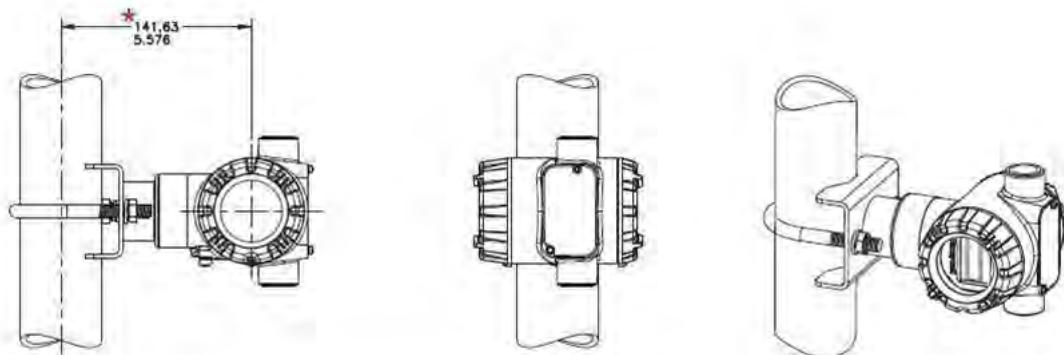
STT 750 with adapter housing - Horizontal Wall Mounting
